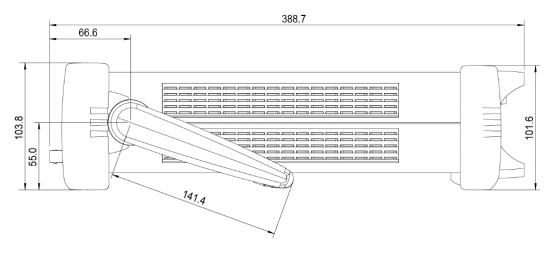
Dimensions (side view, with handle and bumper, in millimeters, nominal)
